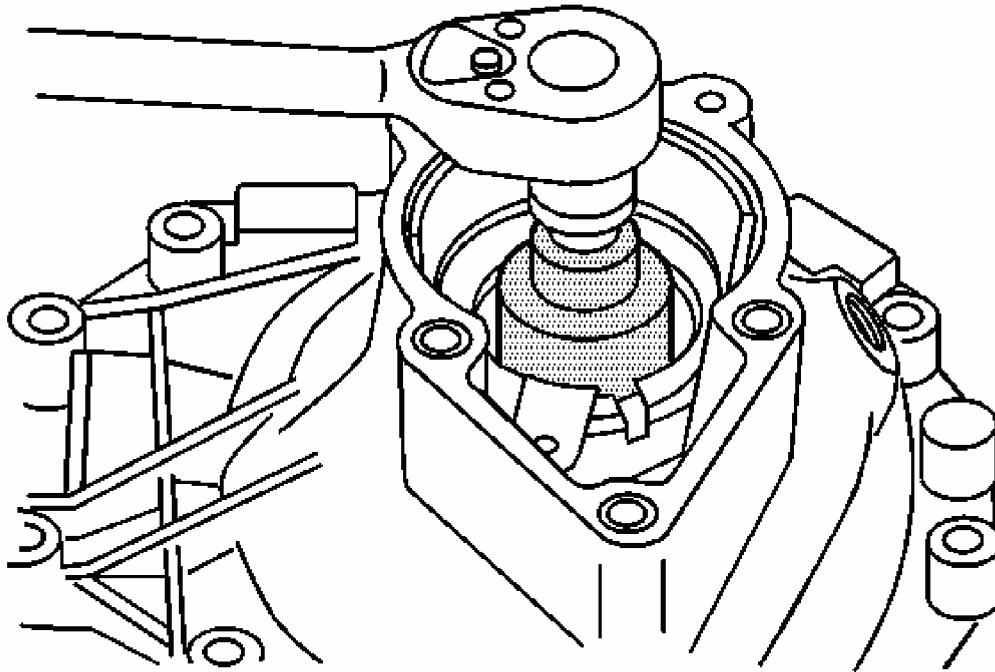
Removing & Installing Right Differential Bearing Adjuster & Differential Case Bearing Cup
